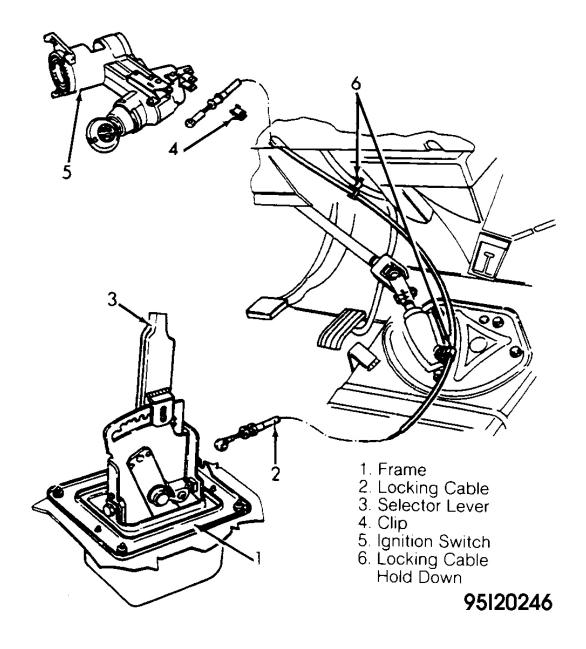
Removing Shift Lock Cable From Shift Lever Support Courtesy of VOLKSWAGEN UNITED STATES, INC.
